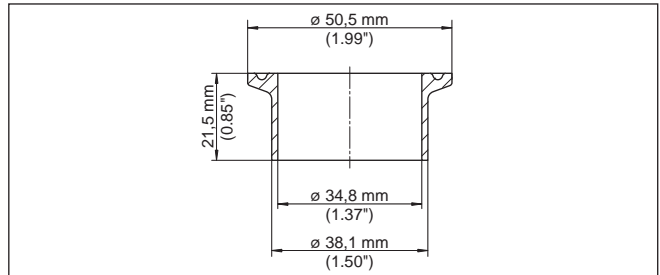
Dimensions of welded socket, Clamp 1½" (DIN 32676, ISO 2852) PN 16
